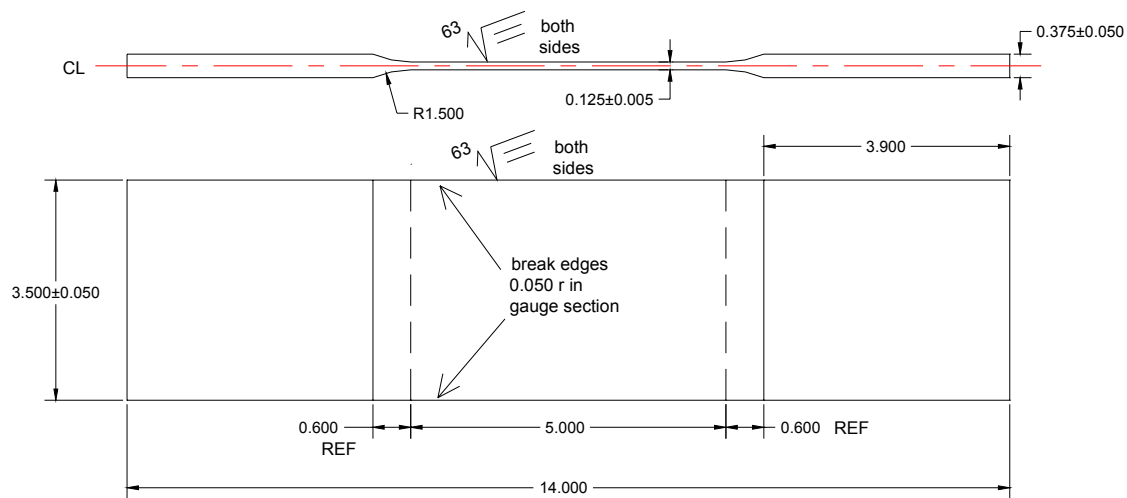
Batch A Corrosion-Fatigue Test Plate Geometry
